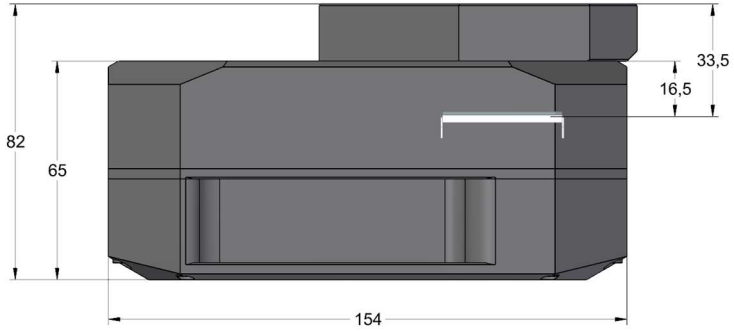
C4 camera head with thick adapter base, compensating the thickness of the External Filter Wheel, side view dimensions
